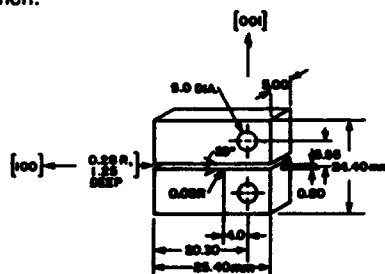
Side-Grooved Sub-Compact Tension Specimen.
